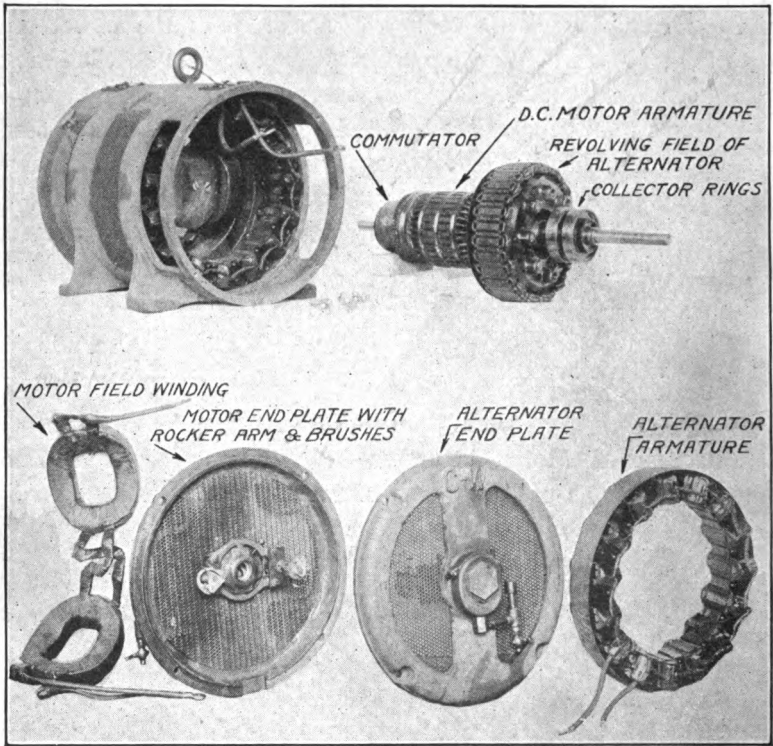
View of Crocker-Wheeler Two-Kilowatt Motor-Generator Parts
